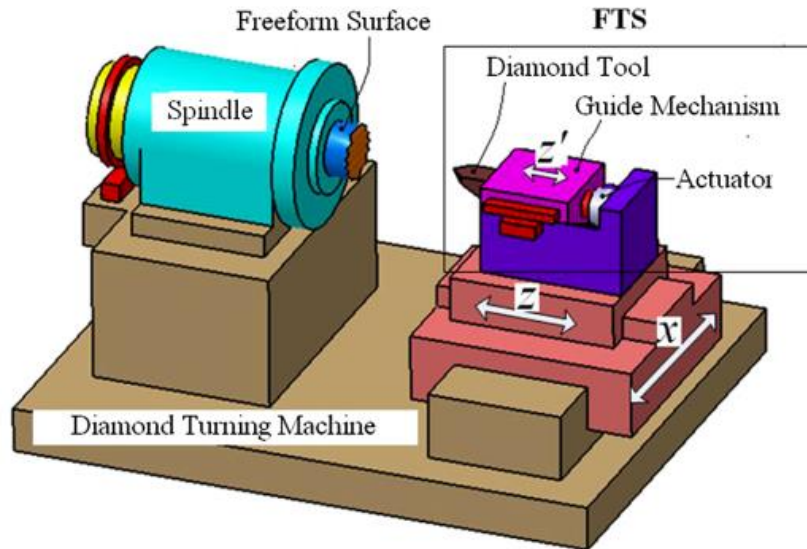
CAD design of a FTS system integrated on a diamond turning machine [141]
